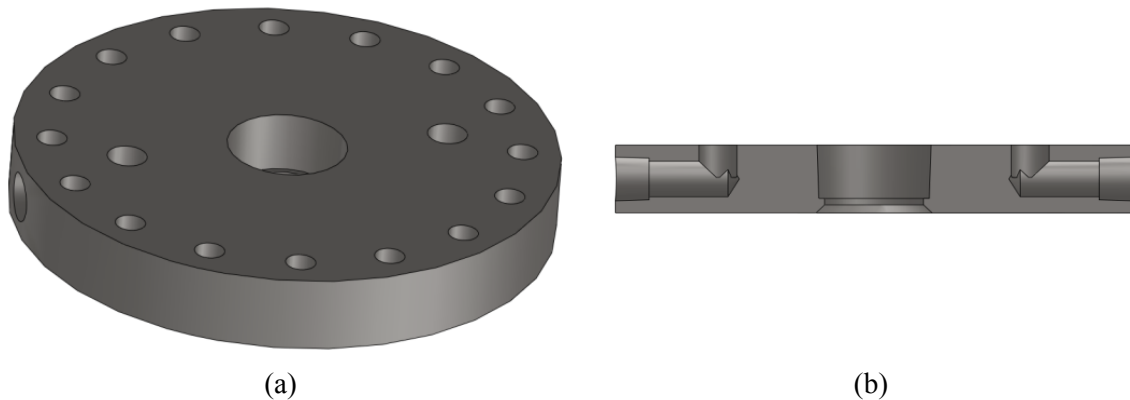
(a) Custom drainage flange (b) Transparent image of drainage flange
